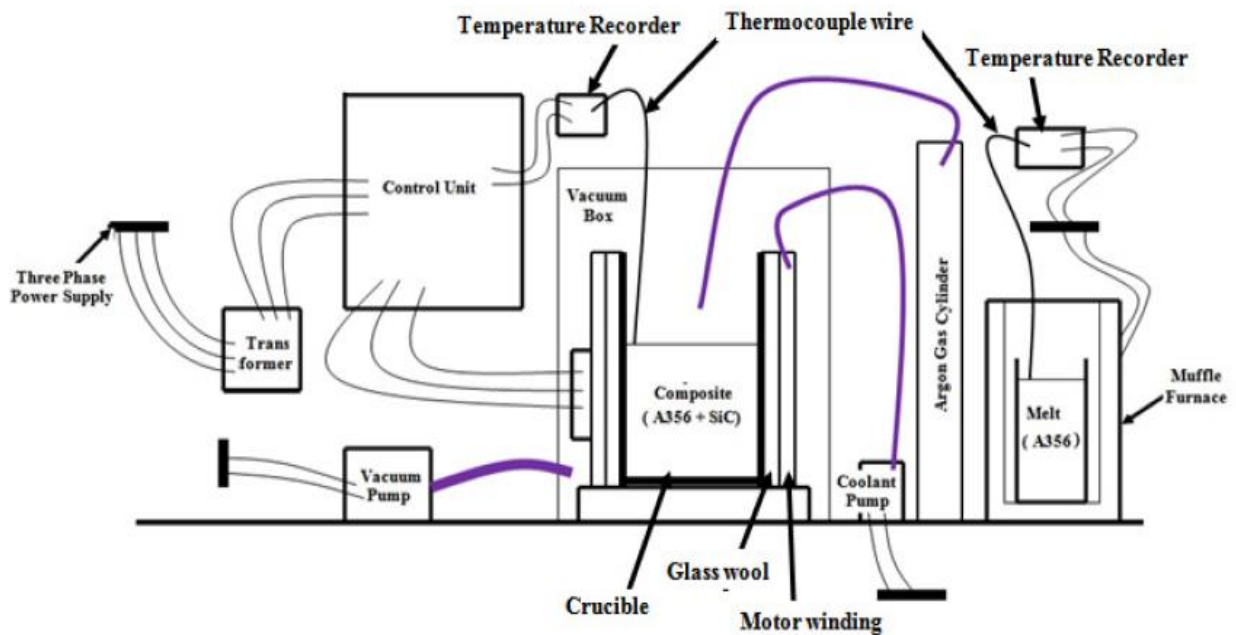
Schematic view of electromagnetic stir casting set-up (Dwivedi et al., 2014)
